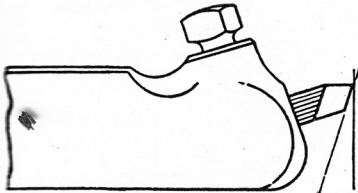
Side view of lathe tool cutter bit ground for cutting screw threads.
